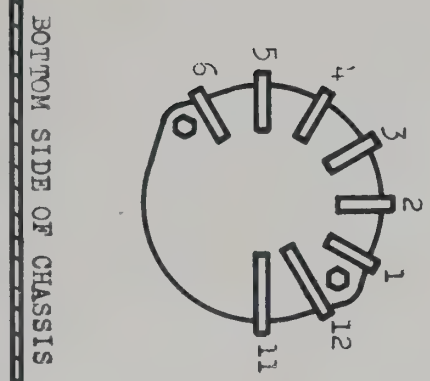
D. SW6, COUPLING SWITCH, REAR VIEW. BOTTOM SIDE OF CHASSIS UP
